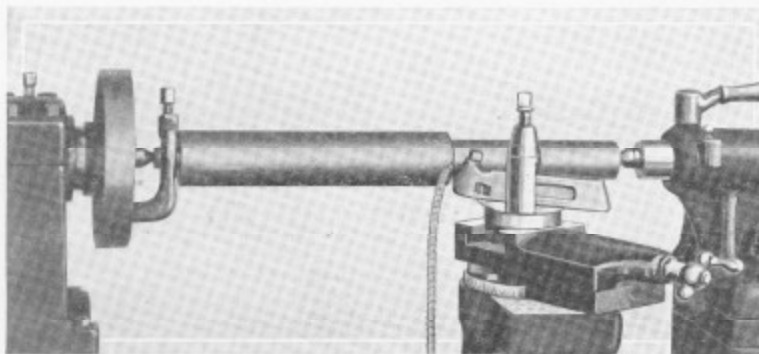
Making a Mandrel for Mounting Front or Rear Wheels
